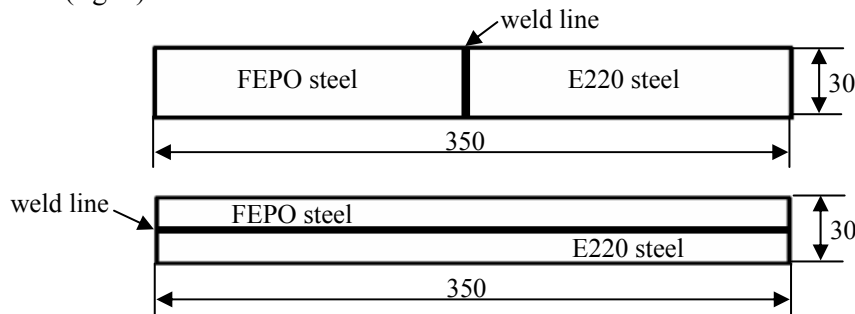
Tailor welded strips with transversal and longitudinal weld line (unit: mm)
